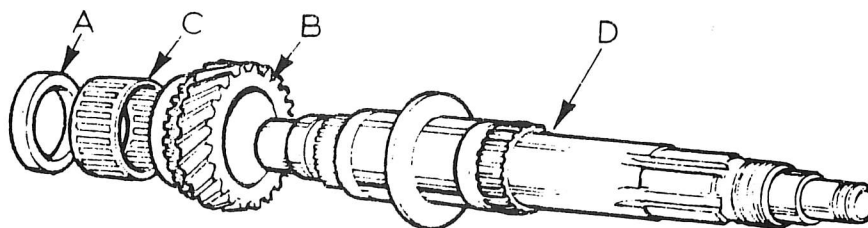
3rd. GEAR AND 3rd. MOTION SHAFT
